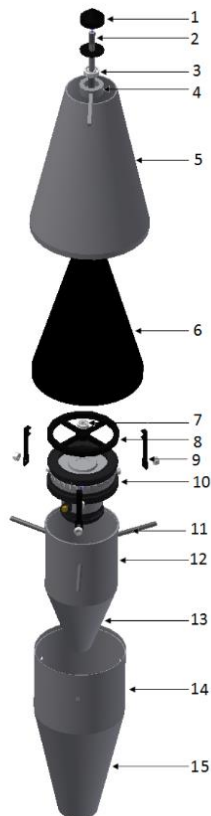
The model of air flow amplifier [1]: 1 – nut, 2 – shaft, 3 – bearing, 4 – the upper support of bearing, 5 – outer cone, 6 – inner cone, 7 – bearing, 8 – bearing support, 9 – support fixing, 10 – engine, 11 – screw fixing, 12 – inner sleeve, 13 – inner cone, 14 – outer sleeve, 15 – outer cone
